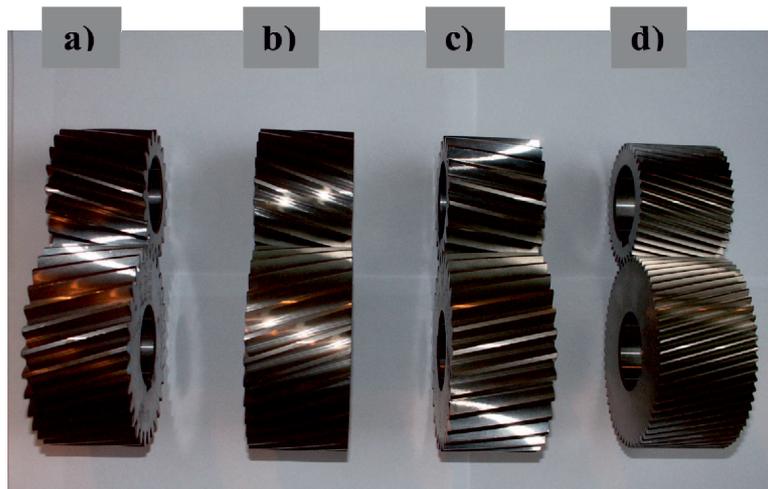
Investigated gear wheels: a, b, c, d – respectively 1, 2, 3, 4 pair of gear wheels
